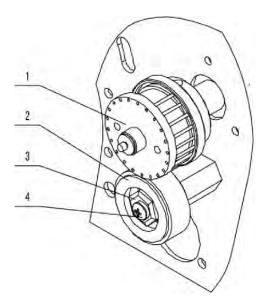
(1) Printing Wheel, (2) Silicone Wheel, (3) Eccentric Sleeve, (4) Screw
